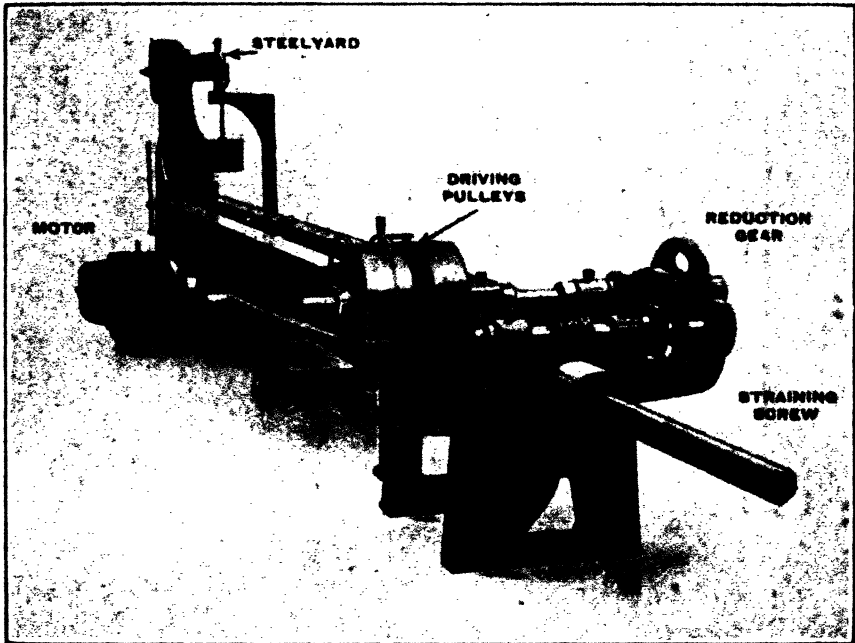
Belt-driven Chain Testing Machine. Capacity 20 tons.
